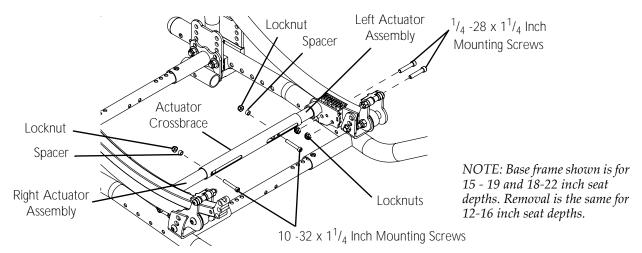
Actuator Crossbrace/Actuator Assembly
